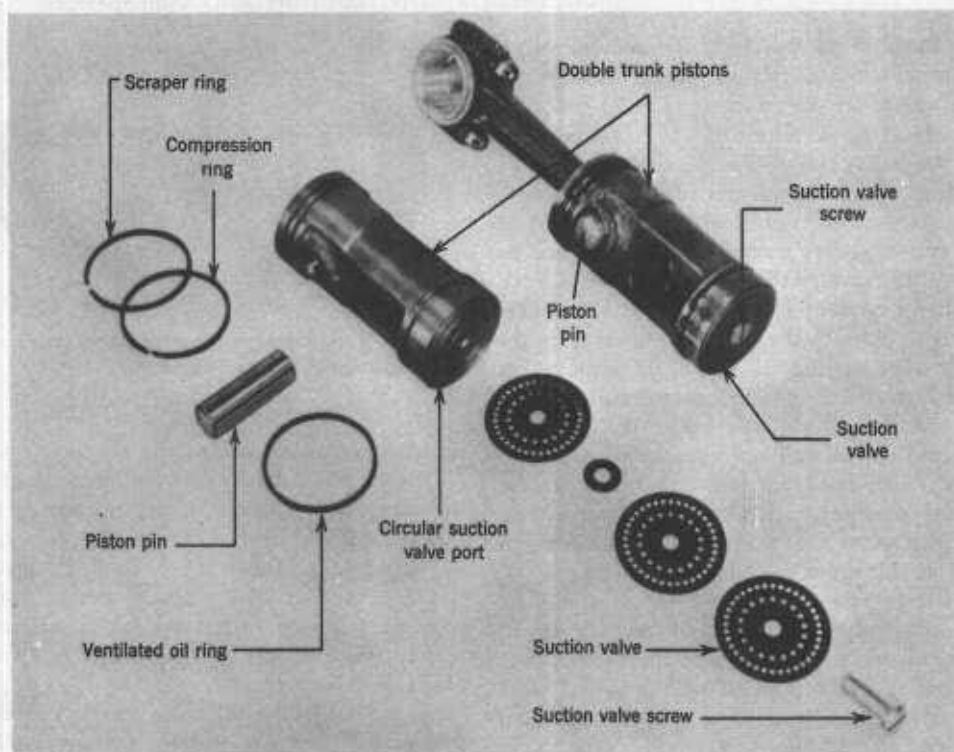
Diaphragm-type suction valve. This same type of valve is often mounted in a valve plate and used as a discharge valve. (Courtesy York Corporation.)
